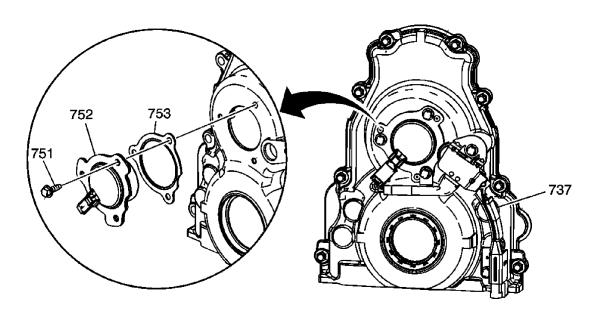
View Of CMP Actuator Magnet & Components Courtesy of GENERAL MOTORS CORP.
